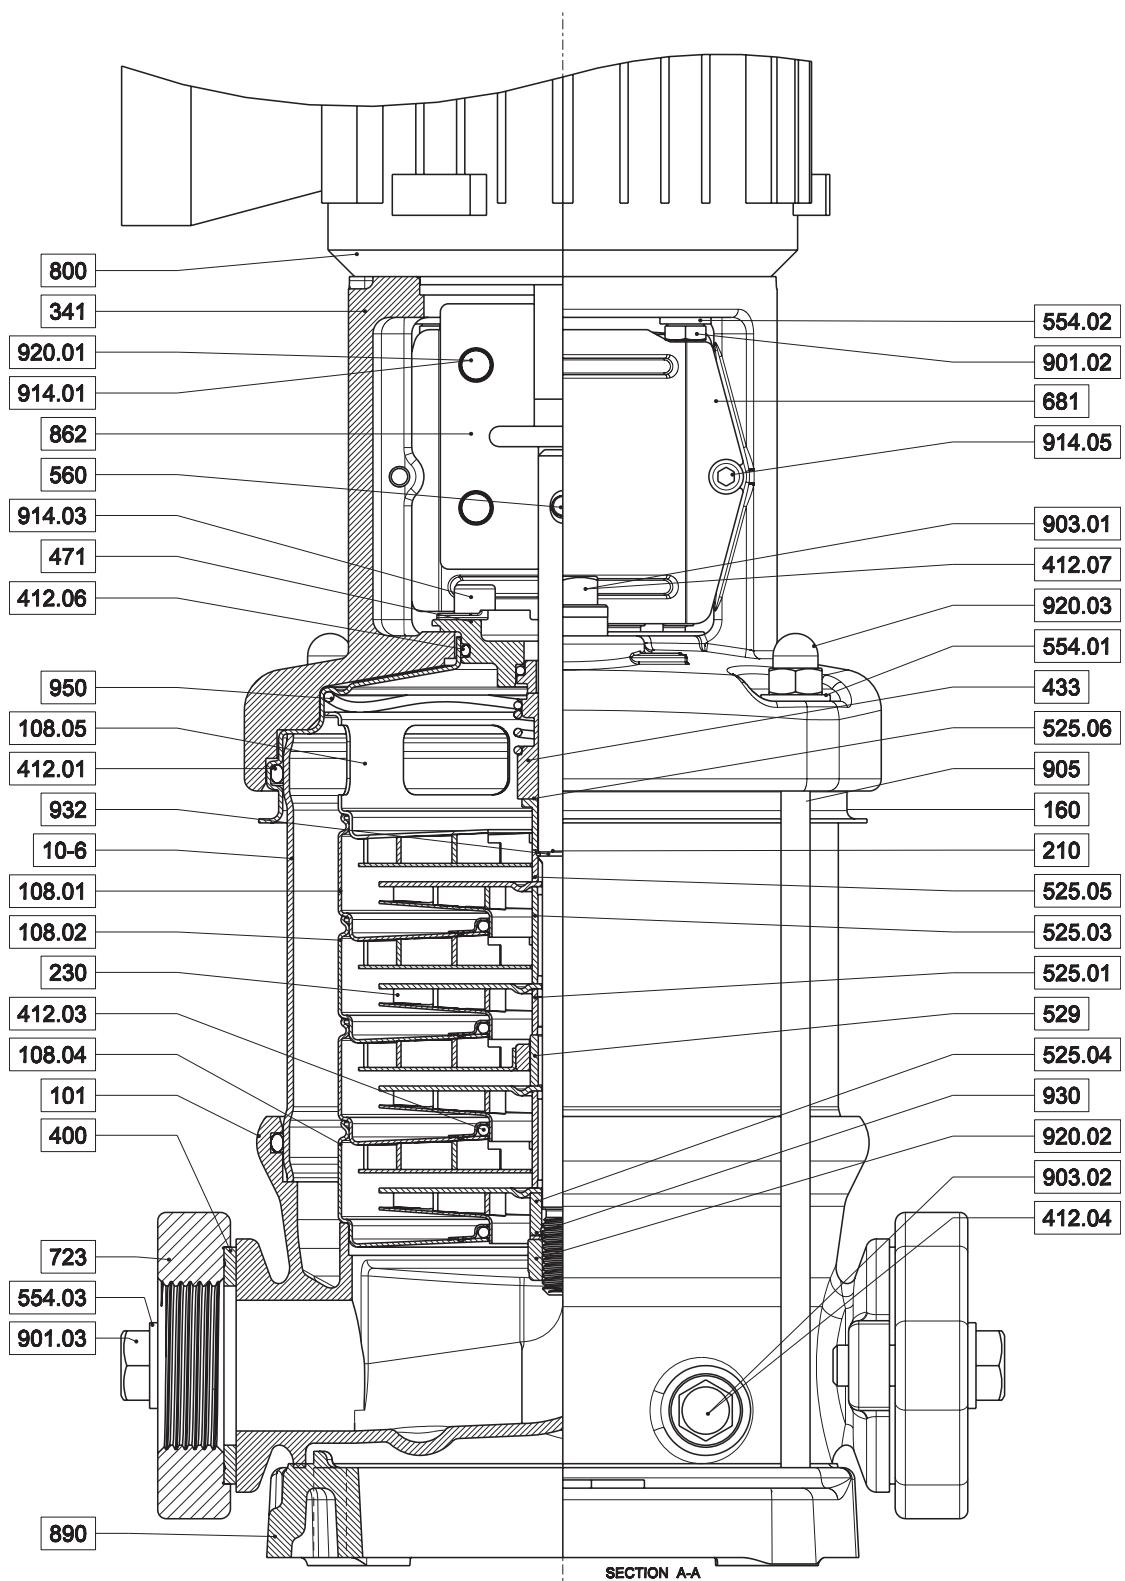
Sectional drawing DPV(S) 2/4/6 B
